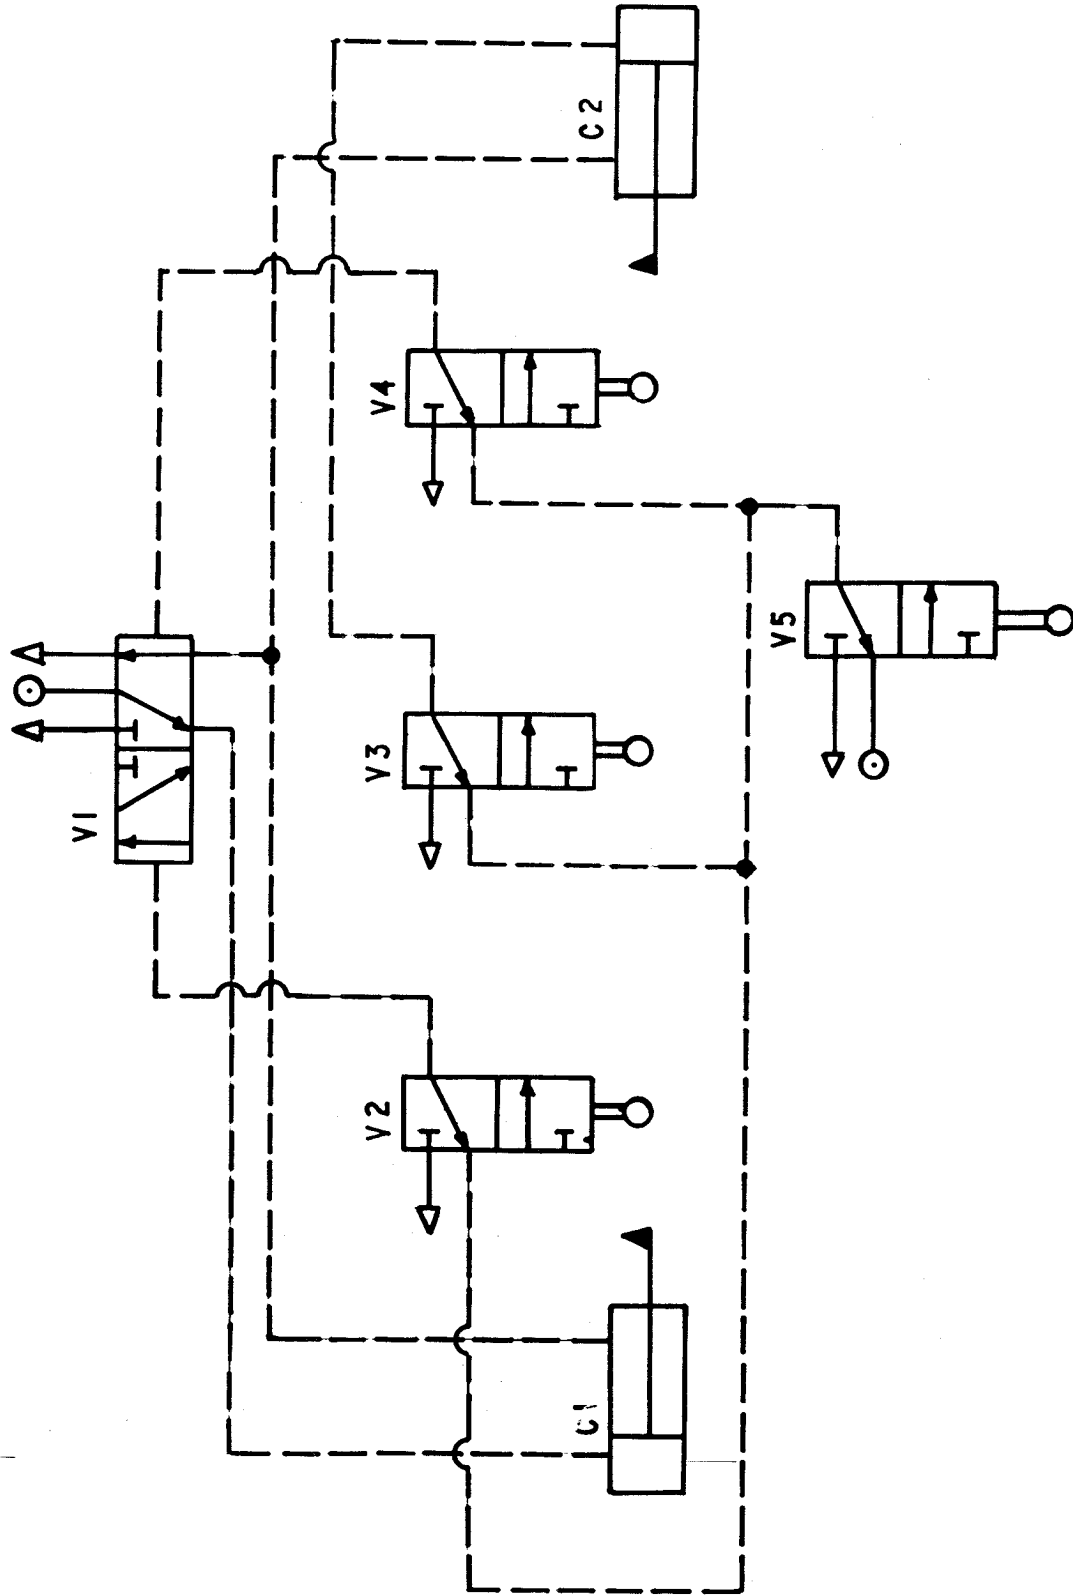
PNEUMATIC CIRCUIT FOR THE PROTOTYPE MACHINE
